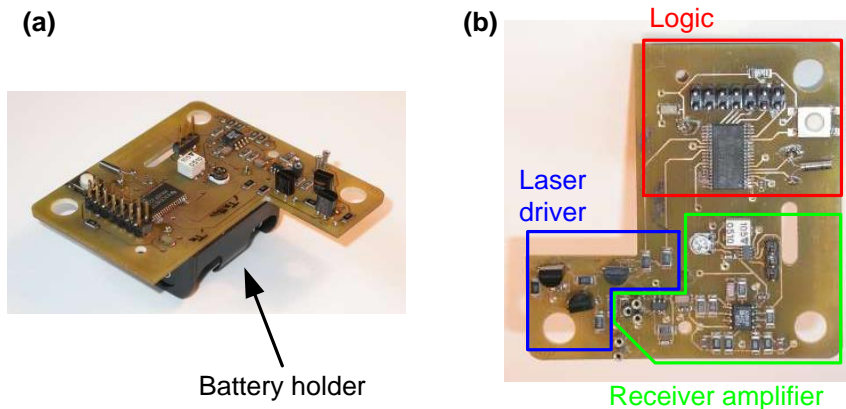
Photographs of the printed circuit boards for a demonstrator of a demarcation device (a) The long-life battery is fixed on the bottom side. (b) The top side carries the electronic circuits for logic, laser driver (shown here for the DFB laser) and receiver.
